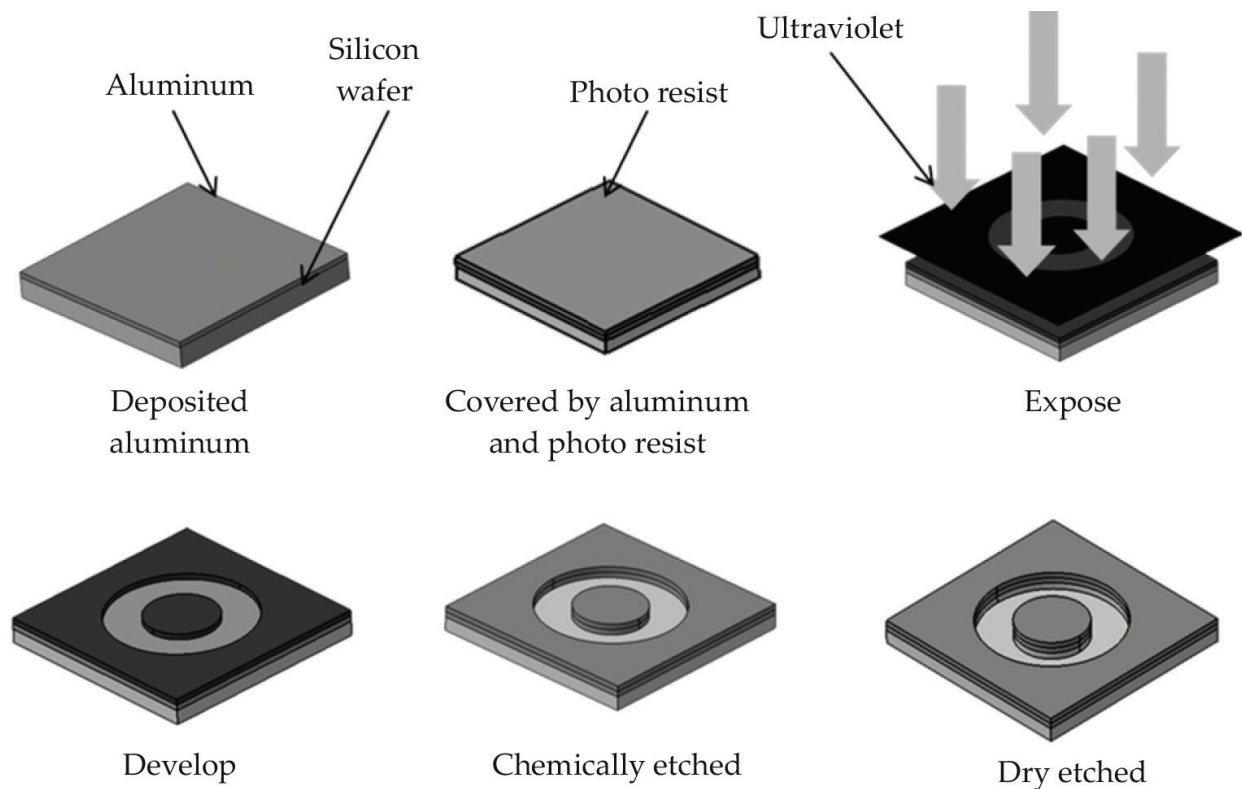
Fabrication process for miniature components of designed MEMS air turbine.
